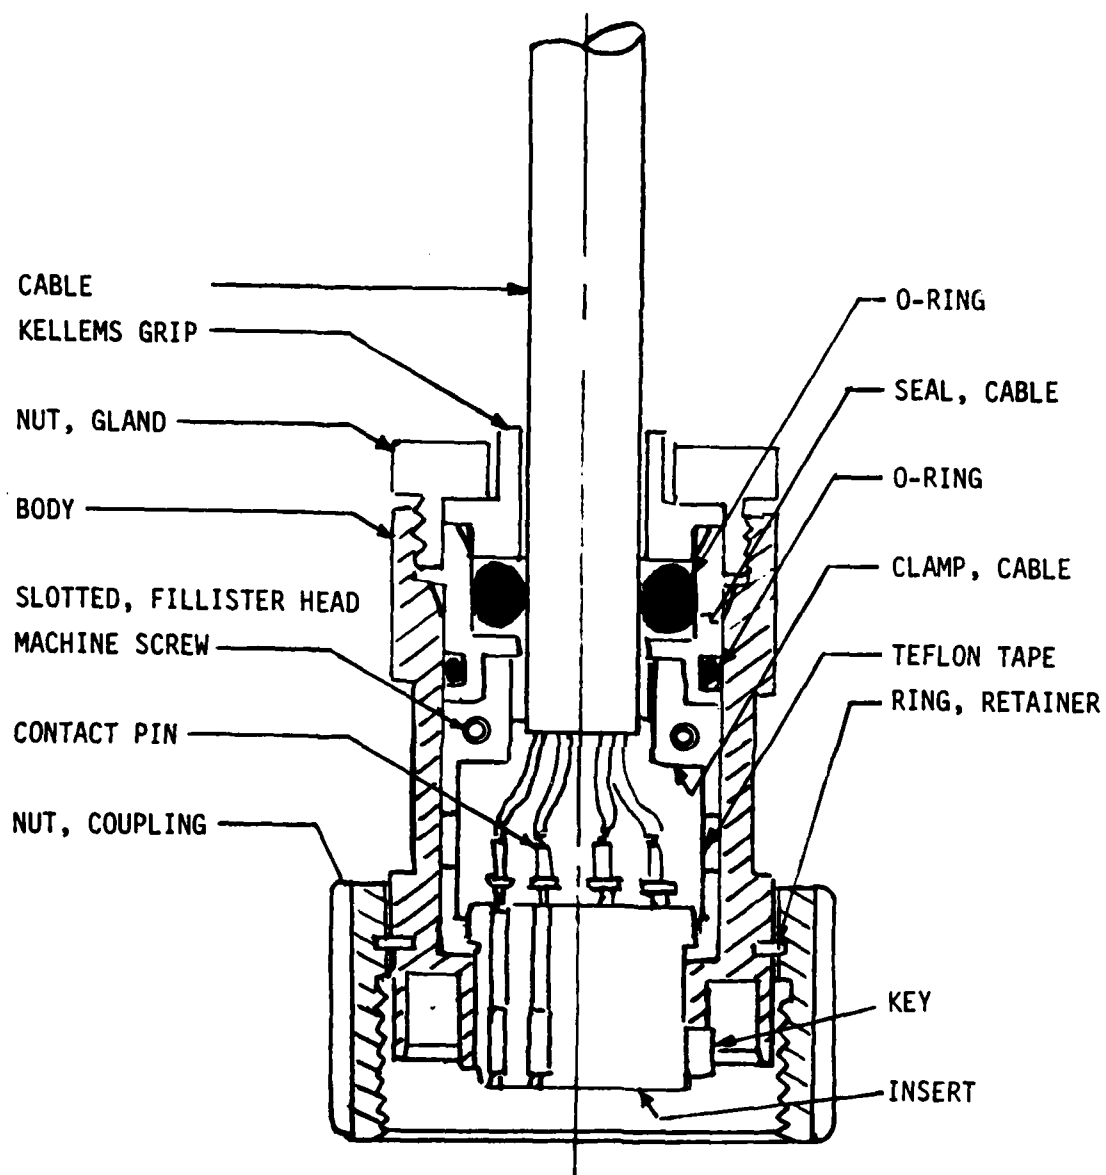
NUSC FIELD ASSEMBLY CONNECTOR
